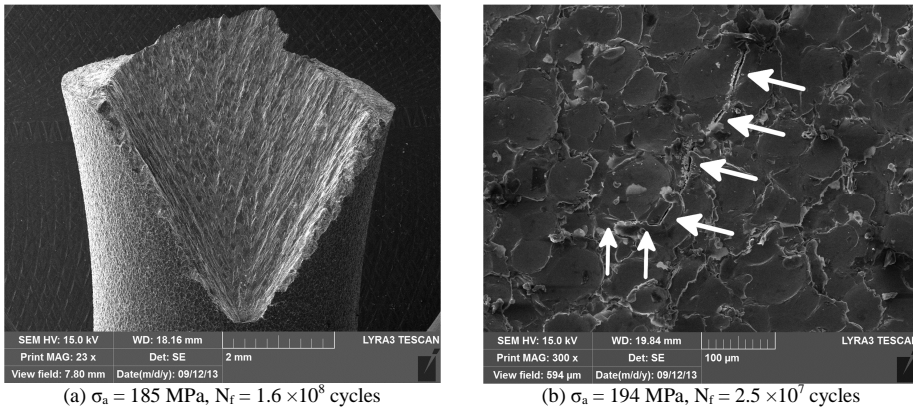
Fracture surface of 9.6N/650 % shot peened specimen in macro view (a) and detail of another initiated fatigue crack under the main crack initiation site (b).
